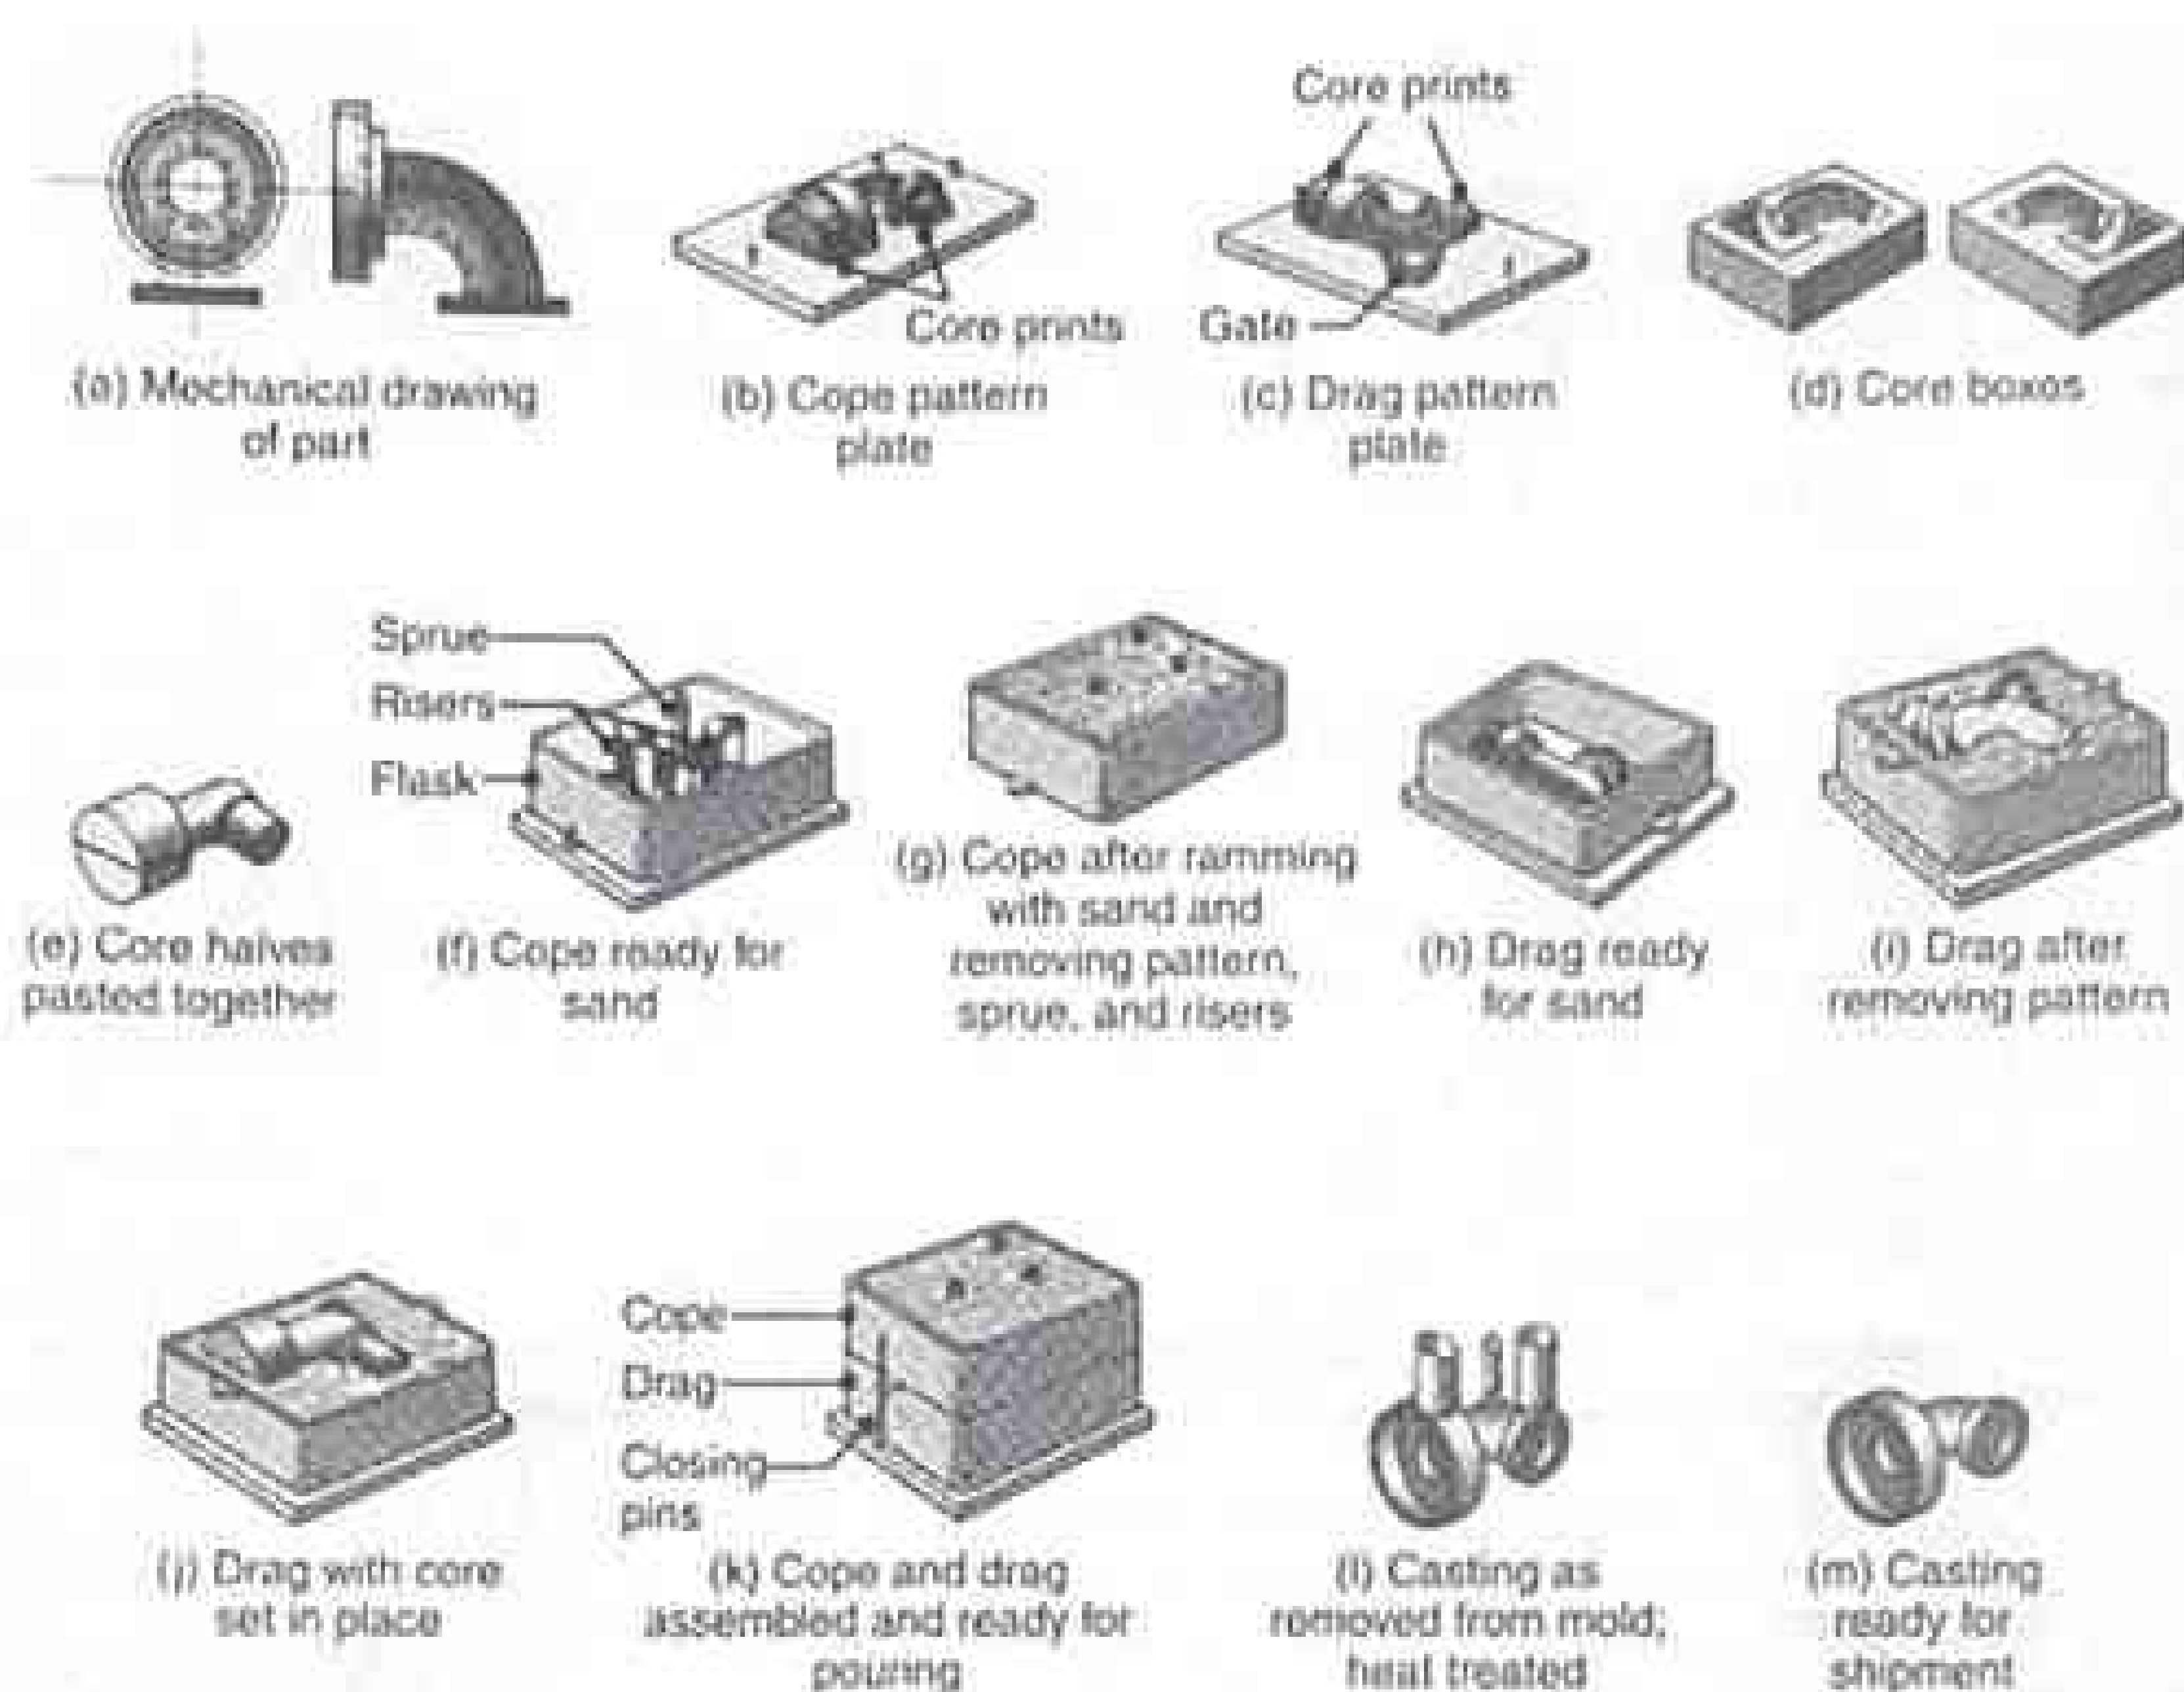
Schematic illustration of the sequence of operations for sand casting. (a) A mechanical drawing of the part is used to generate a design for the pattern. Considerations such as part shrinkage and draft must be built into the drawing. (b) and (c) Patterns have been mounted on plates equipped with pins for alignment; note the presence of core prints designed to hold the core in place. (d) and (e) Core boxes produce core halves, which are pasted together; the cores will be used to produce the hollow area of the part shown in (a). (f) The cope half of the mold is assembled by securing the cope pattern plate to the flask with aligning pins and attaching inserts to form the sprue and risers. (g) The flask is rammed with sand, and the plate and inserts are removed. (h) The drag half is produced in a similar manner with the pattern inserted; a bottom board is placed below the drag and aligned with pins. (i) The pattern, flask, and bottom board are inverted, and the pattern is withdrawn, leaving the appropriate imprint. (j) The core is set in place within the drag cavity. (k) The mold is closed by placing the cope on top of the drag and securing the assembly with pins; the flasks are then subjected to pressure to counteract buoyant forces in the liquid, which might lift the cope. (l) After the metal solidifies, the casting is removed from the mold. (m) The sprue and risers are cut off and recycled, and the casting is cleaned, inspected, and heat treated (when necessary).
